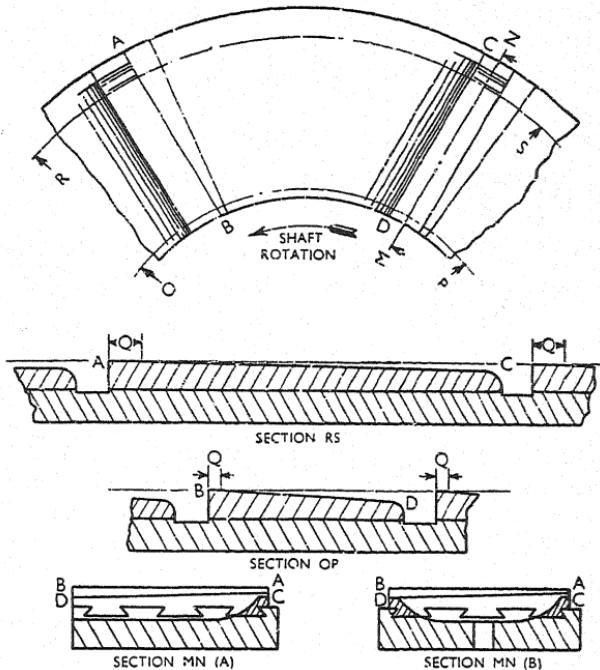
Face and Sectional Views of Tapered Land and Oil Grooves
